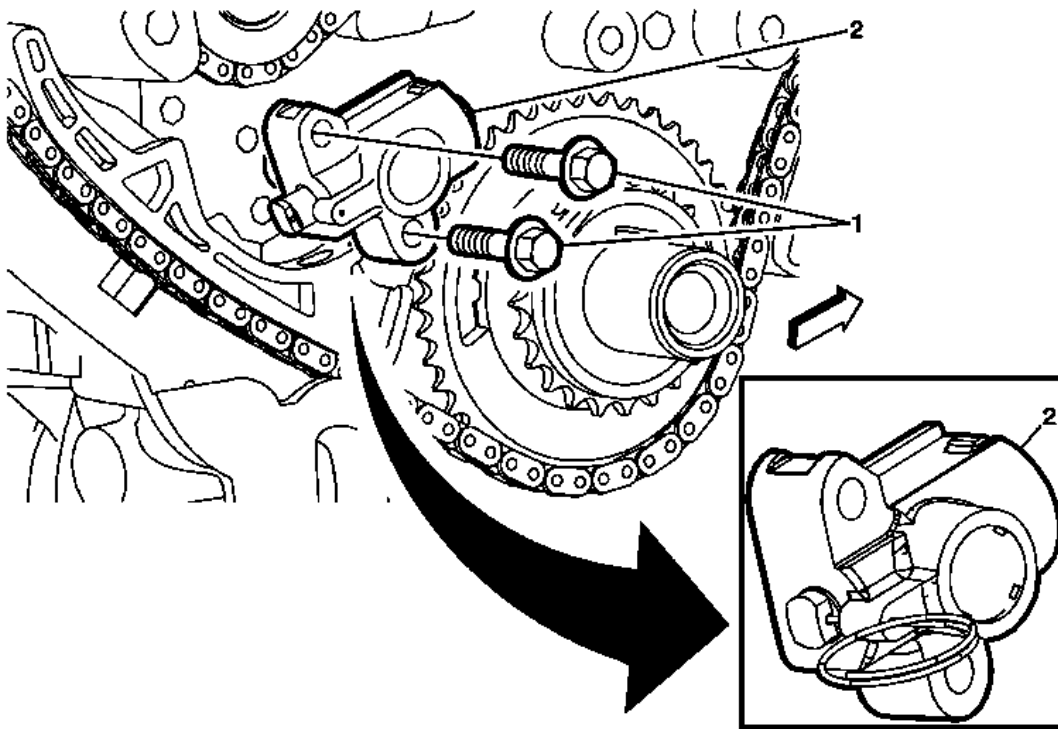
Water Pump and Balance Shaft Chain Tensioner
